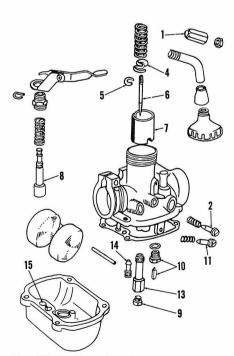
Exploded view of typical carburetor used on HM/S, 7D and 7S models.
